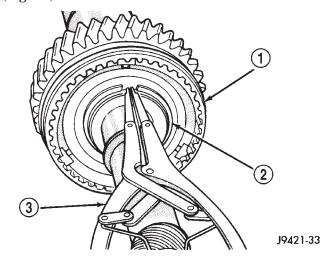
Fifth-Reverse Synchro Hub Snap Ring Removal
